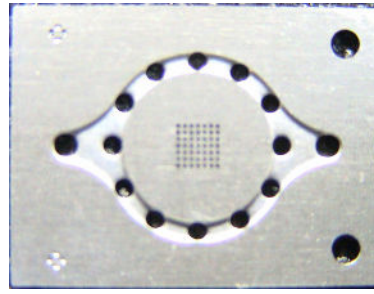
The fabricated stainless steel bottom view of channel plate I
